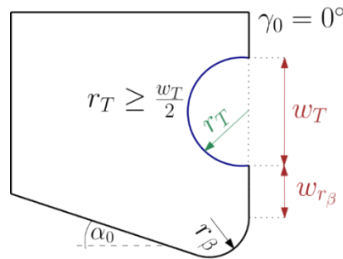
Parametrised tool with rake face groove “Täschli” and its main dimensions
